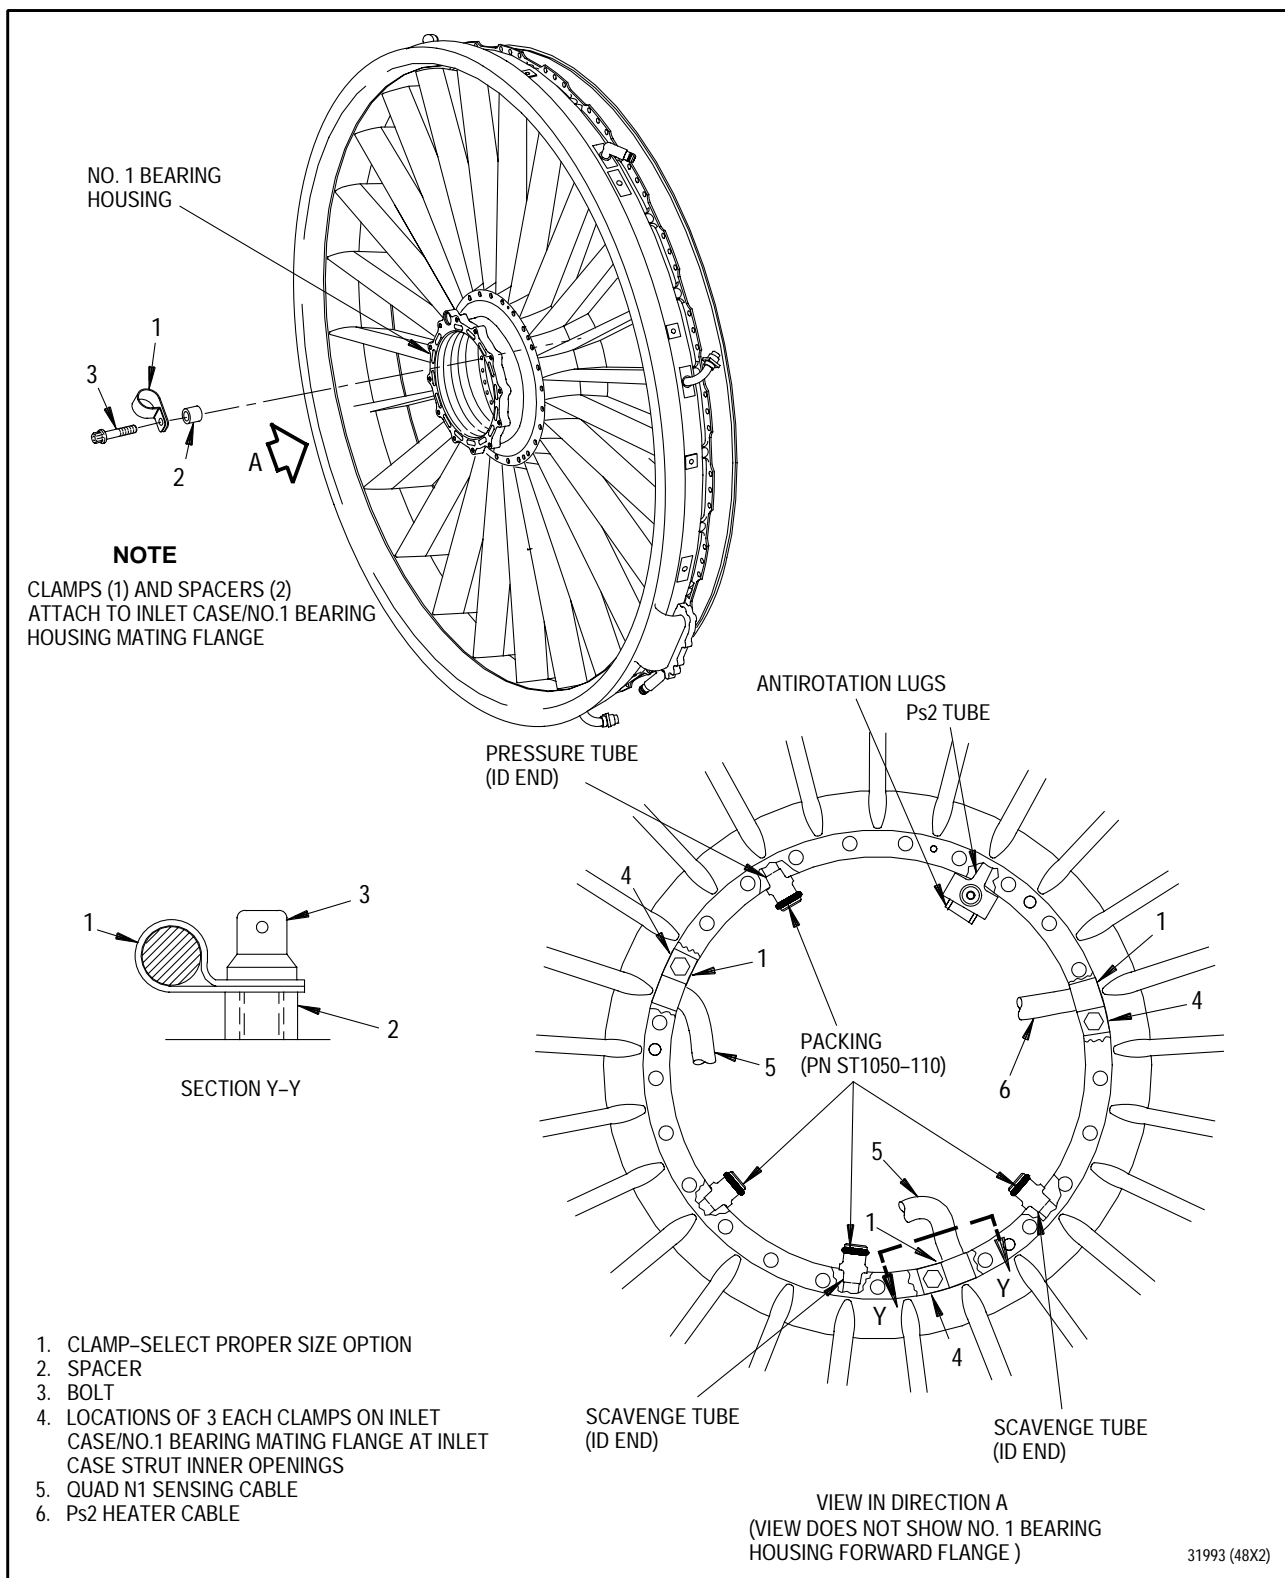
B. No. 1 Bearing Housing - Installation (After T.O. 2J-F100229(I)-503)
